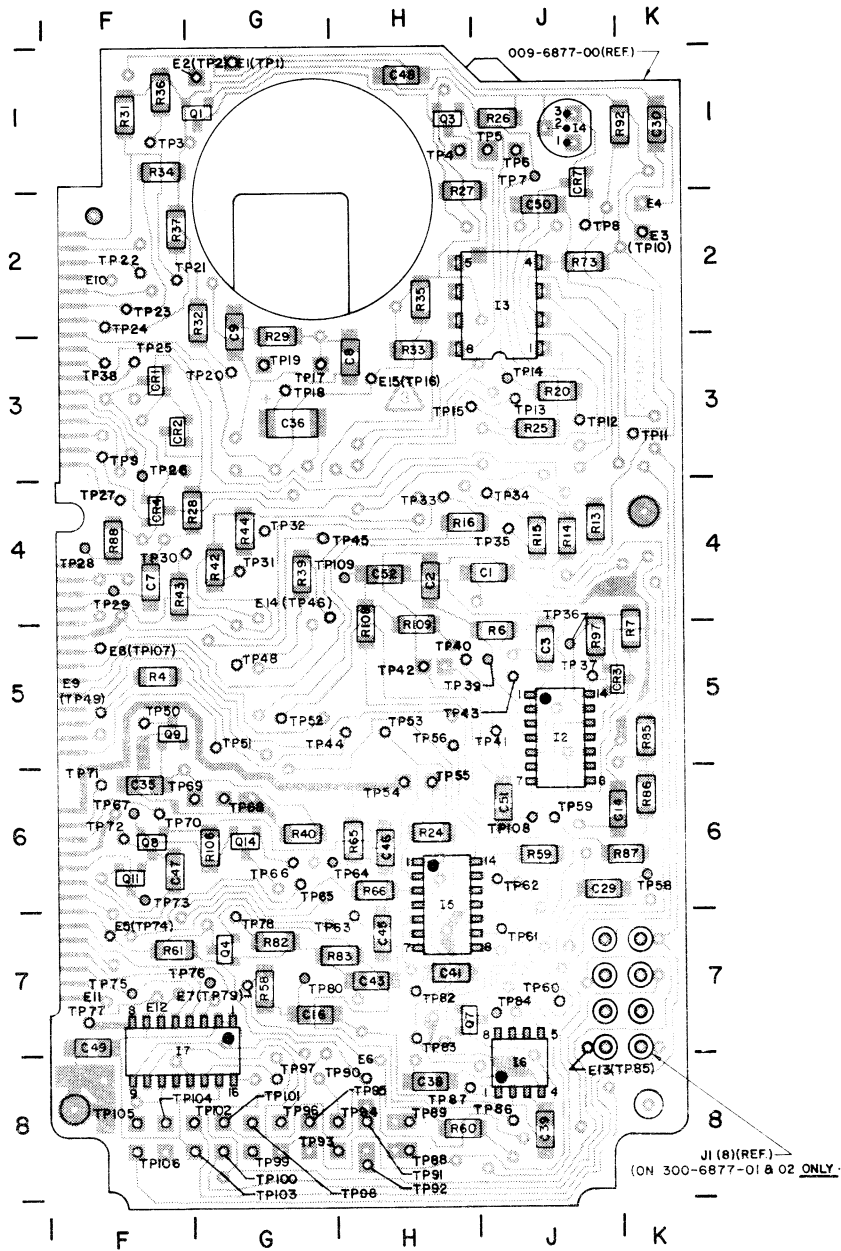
SYSTEM BOARD ASSEMBLY
